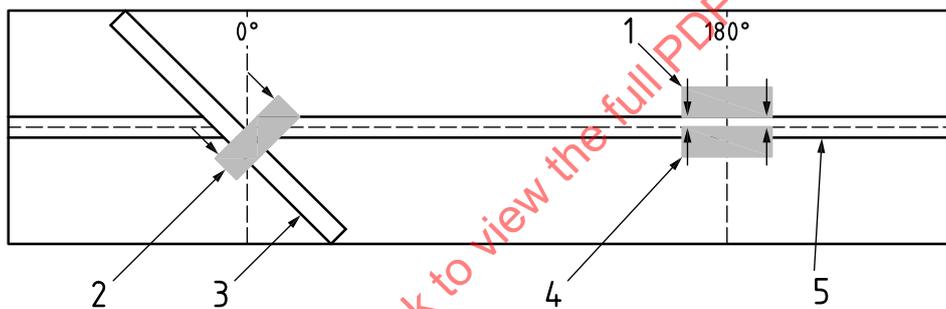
Expanded view of the pipe specimen showing the location of the four metallographic sections to be taken from a girth welded pipe
